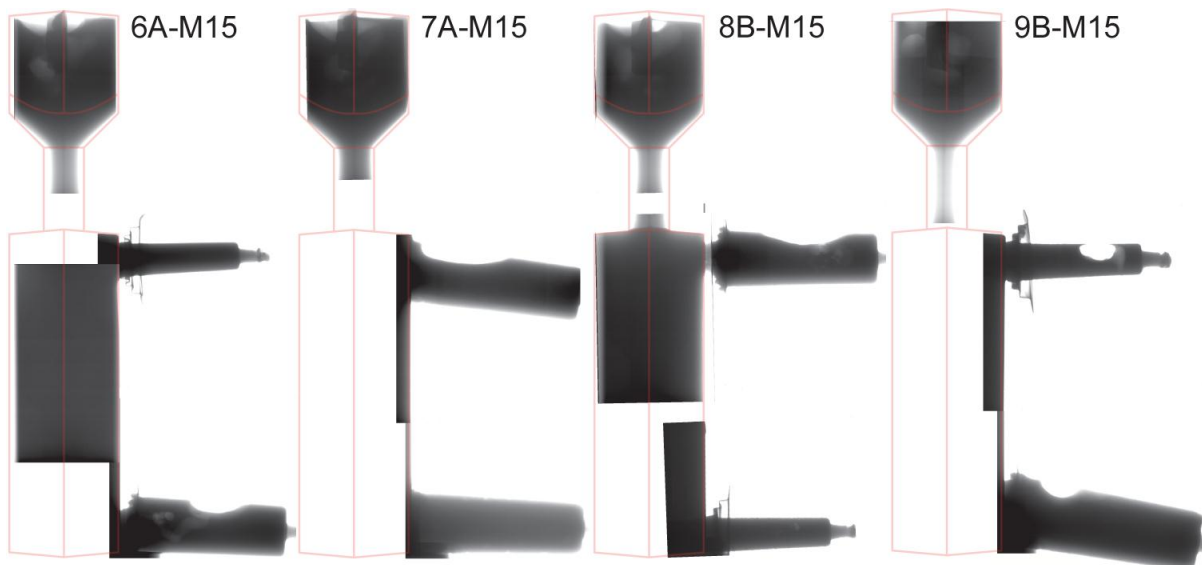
X-ray images of casting 6A, 7A, 8B, and 9B—all that largest casting with a modulus of 15 mm.
